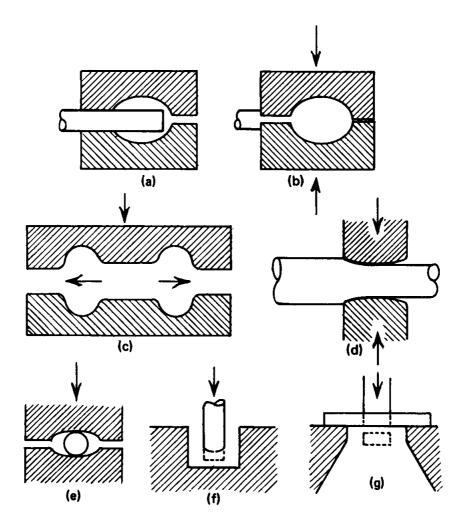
Forging operations; (a, b) edding; (c) fullering; (d) drawing, (e) swaging, (f) back extruding; (g) punching.
